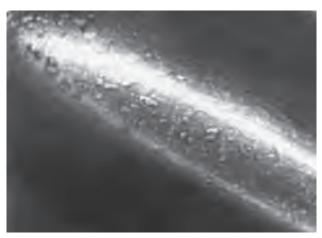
Electric Corrosion on Outer Ring Surface of Deep Groove Ball Bearing
